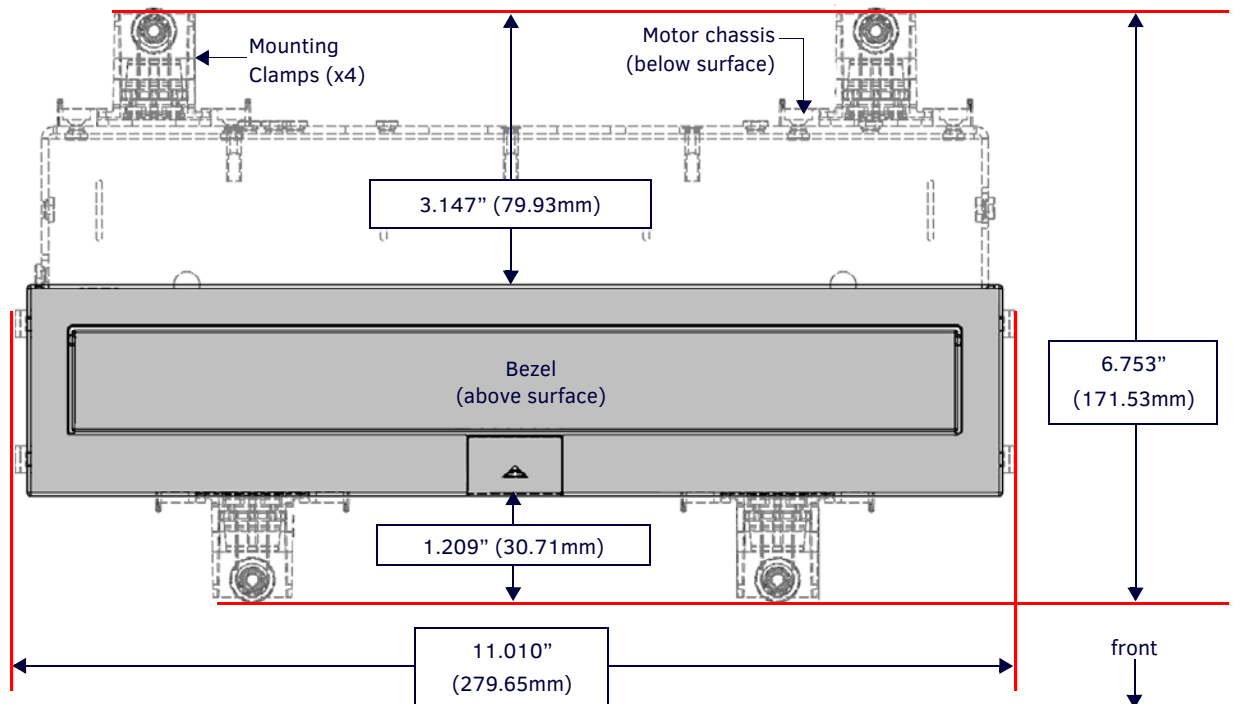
MXR-1001: Top view, indicating area required below the mounting surface
